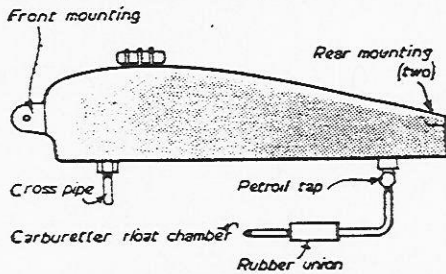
The tank is disconnected from the carburettor at the rubber union shown.
